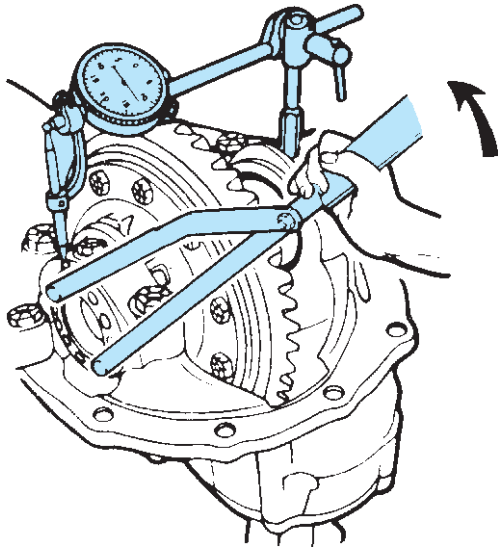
Turning the adjuster as shown will reduce the amount of case spread and preload on the carrier bearings and increase backlash slightly. The amount of case spread can be read on the dial indicator. (Courtesy of Ford Motor Company)
